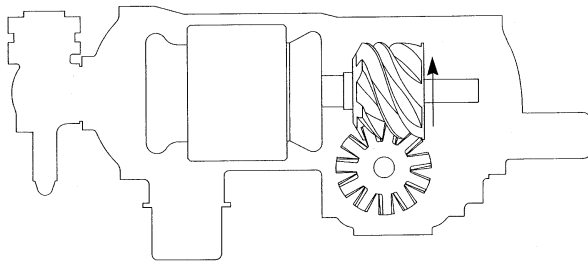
Single Gate Rotor Semihermetic Single-Screw Compressor
